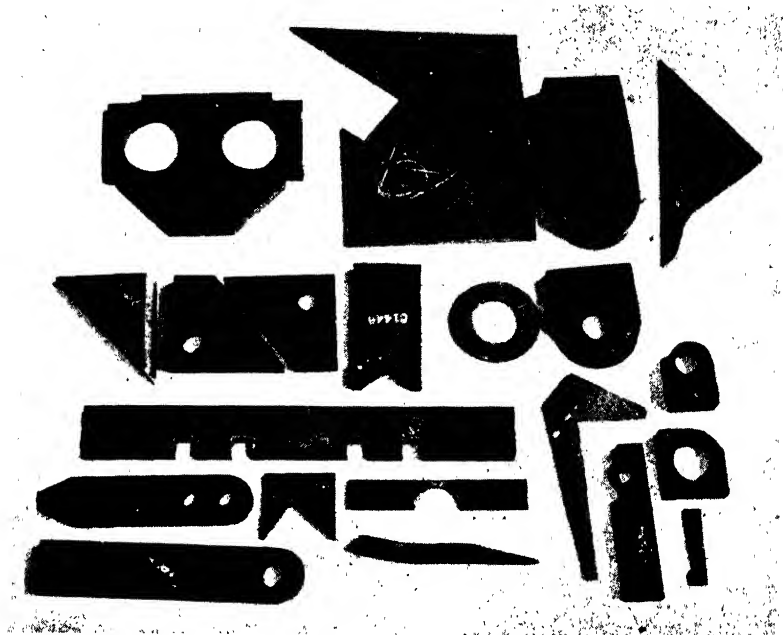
An endless variety of notches, radii, irregular cuts, and finishing cuts can be made profitably with a magnetic flame cutter on sheared or sawed parts. Most of the holes in these parts are drilled or punched. (Courtesy of R. G. LeTourneau, Inc.)
